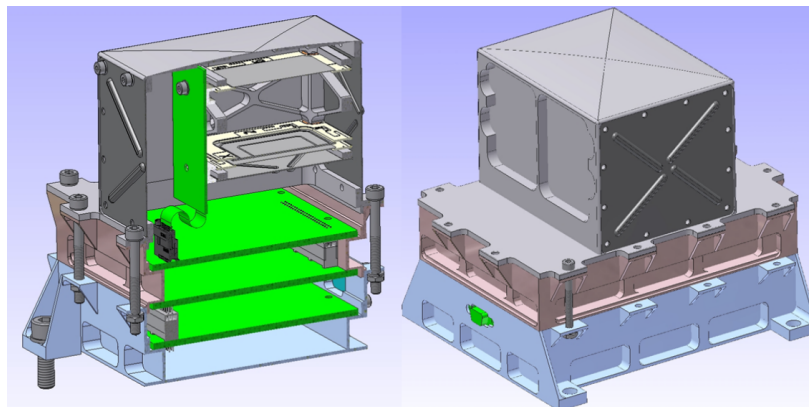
The mechanical design of FRED. The left side shows a cross section of the experiment housing. The PCBs (green) are mounted inside the housing. And on the right side one can see a CAD drawing of the whole instrument [Möller *et al.*, 2013a].
